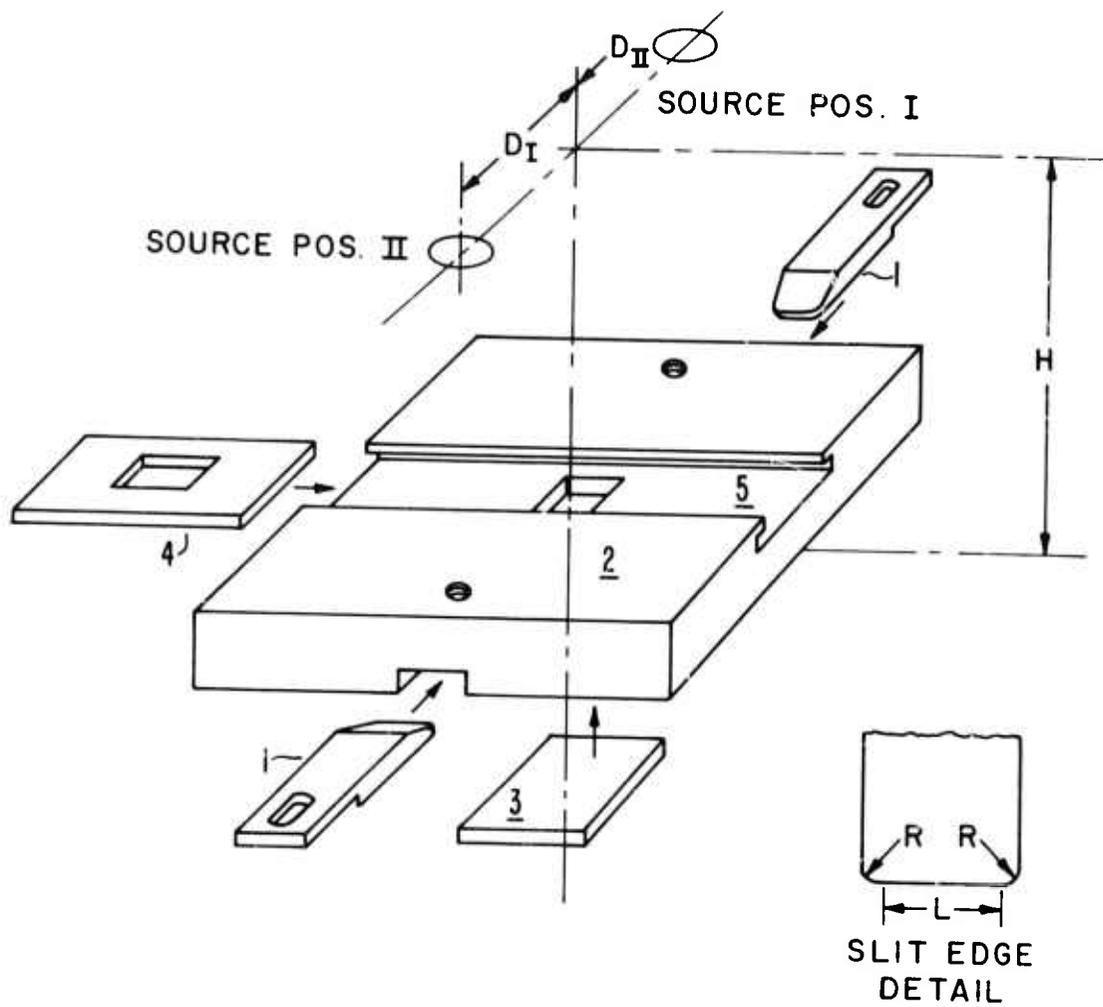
Sketch of experimental jig for forming stripe guide coupler patterns during evaporation.
